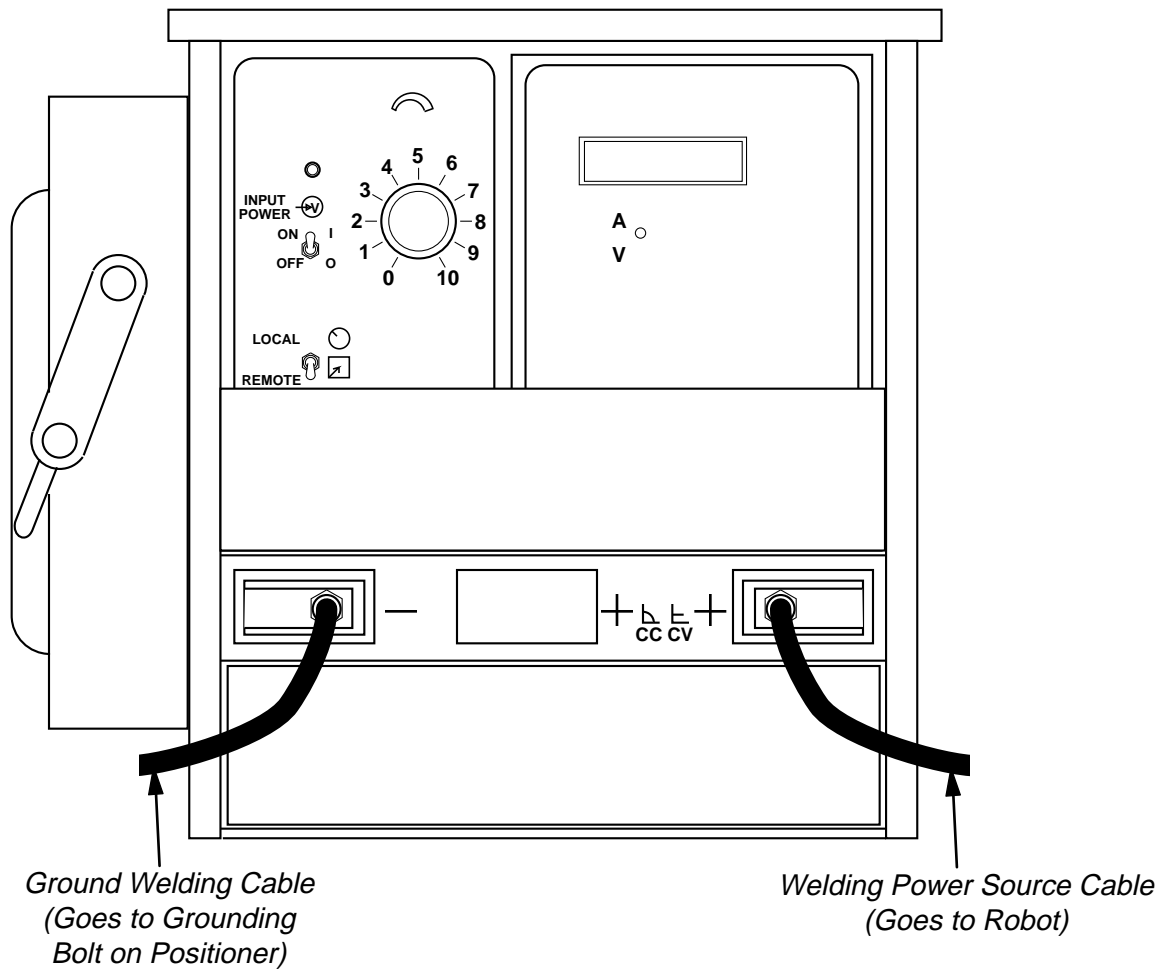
Positive and Negative Terminals on Welding Power Source
